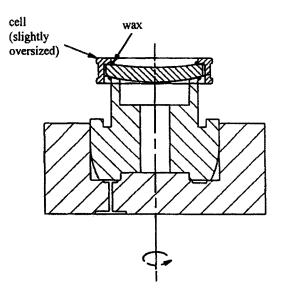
A partially machined cell centered to spindle axis on top of the lens and attached to the lens with wax.
